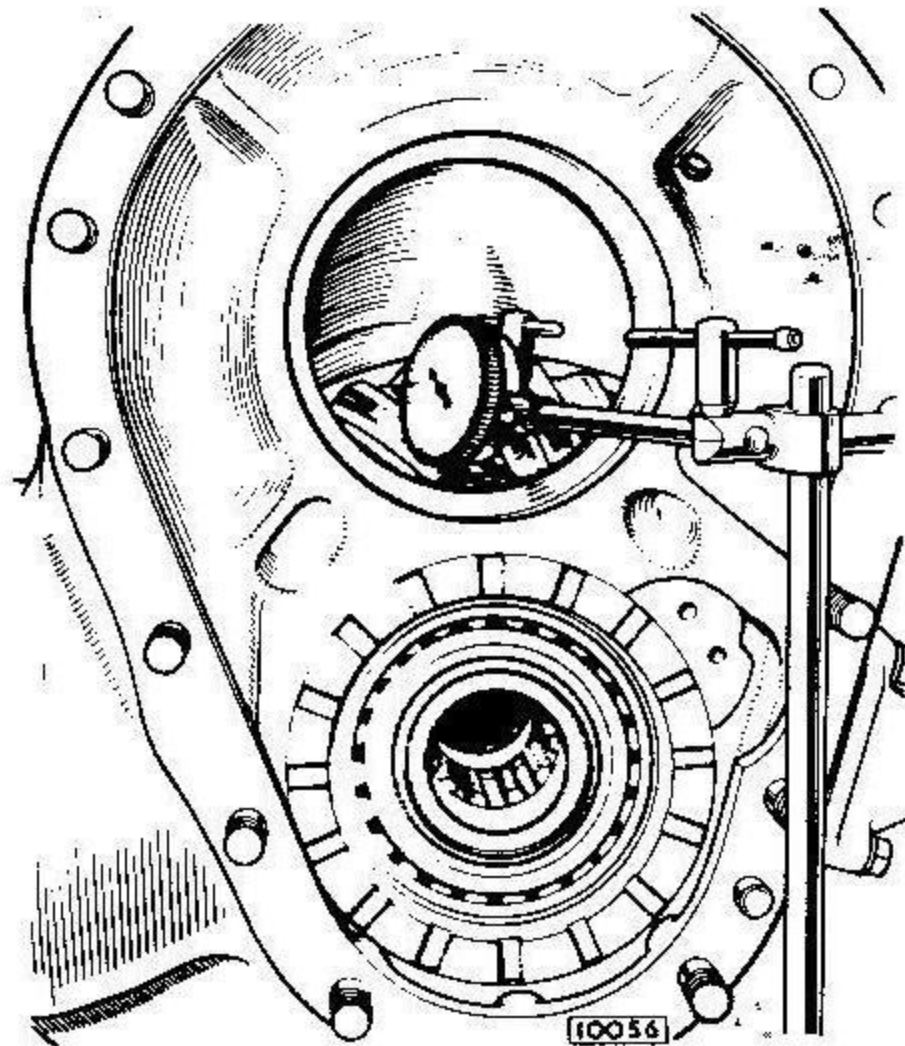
Checking the backlash between the crown wheel and pinion with a clock gauge
